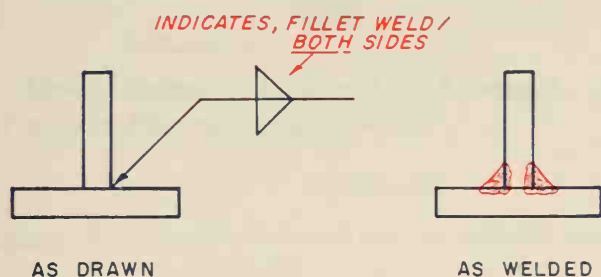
Welding symbol placed above and below the reference line means to weld both sides
